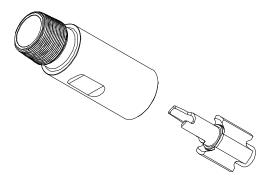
HH46, HH57, HH68, HH108 End Cap, Valve Guide, Shock Absorber
